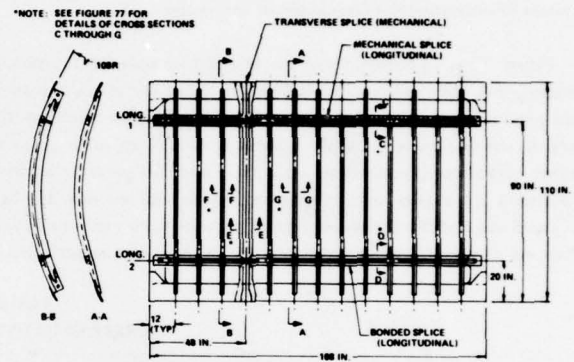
STRUCTURAL ARRANGEMENT OF TEST PANEL
